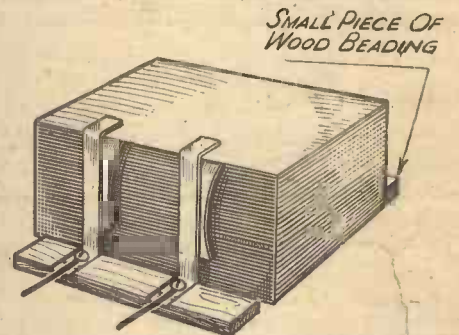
Method of holding a midjet H.T. battery in place, and making the necessary contacts.
